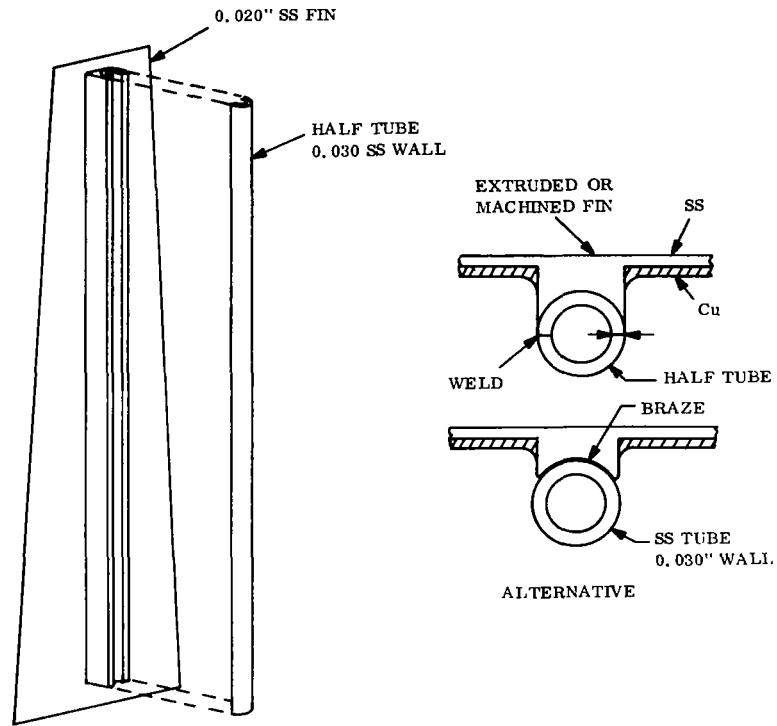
Flow Tube/Fin Assembly (Step 1)
